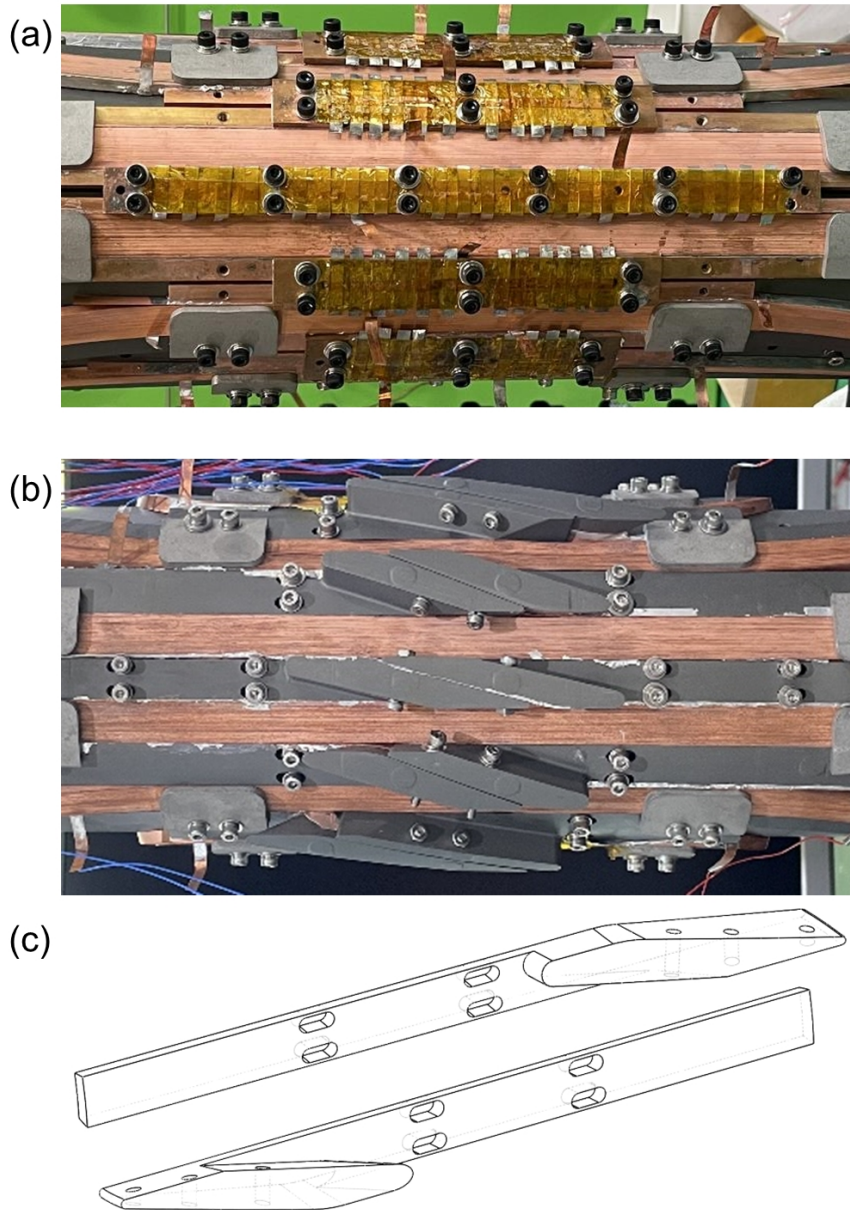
Introduction of a wedge structure for the straight section's mechanical support. (a) Straight section reinforcement structure made with copper leads, (b) straight section reinforcement structure using wedge design, (c) manufacturing drawing of the wedge structure.
